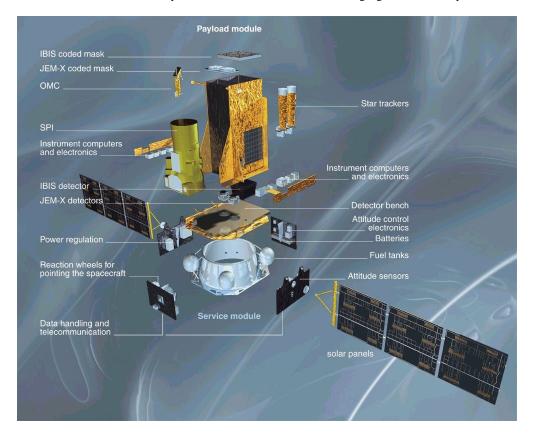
Exploded view of the INTEGRAL Spacecraft.
